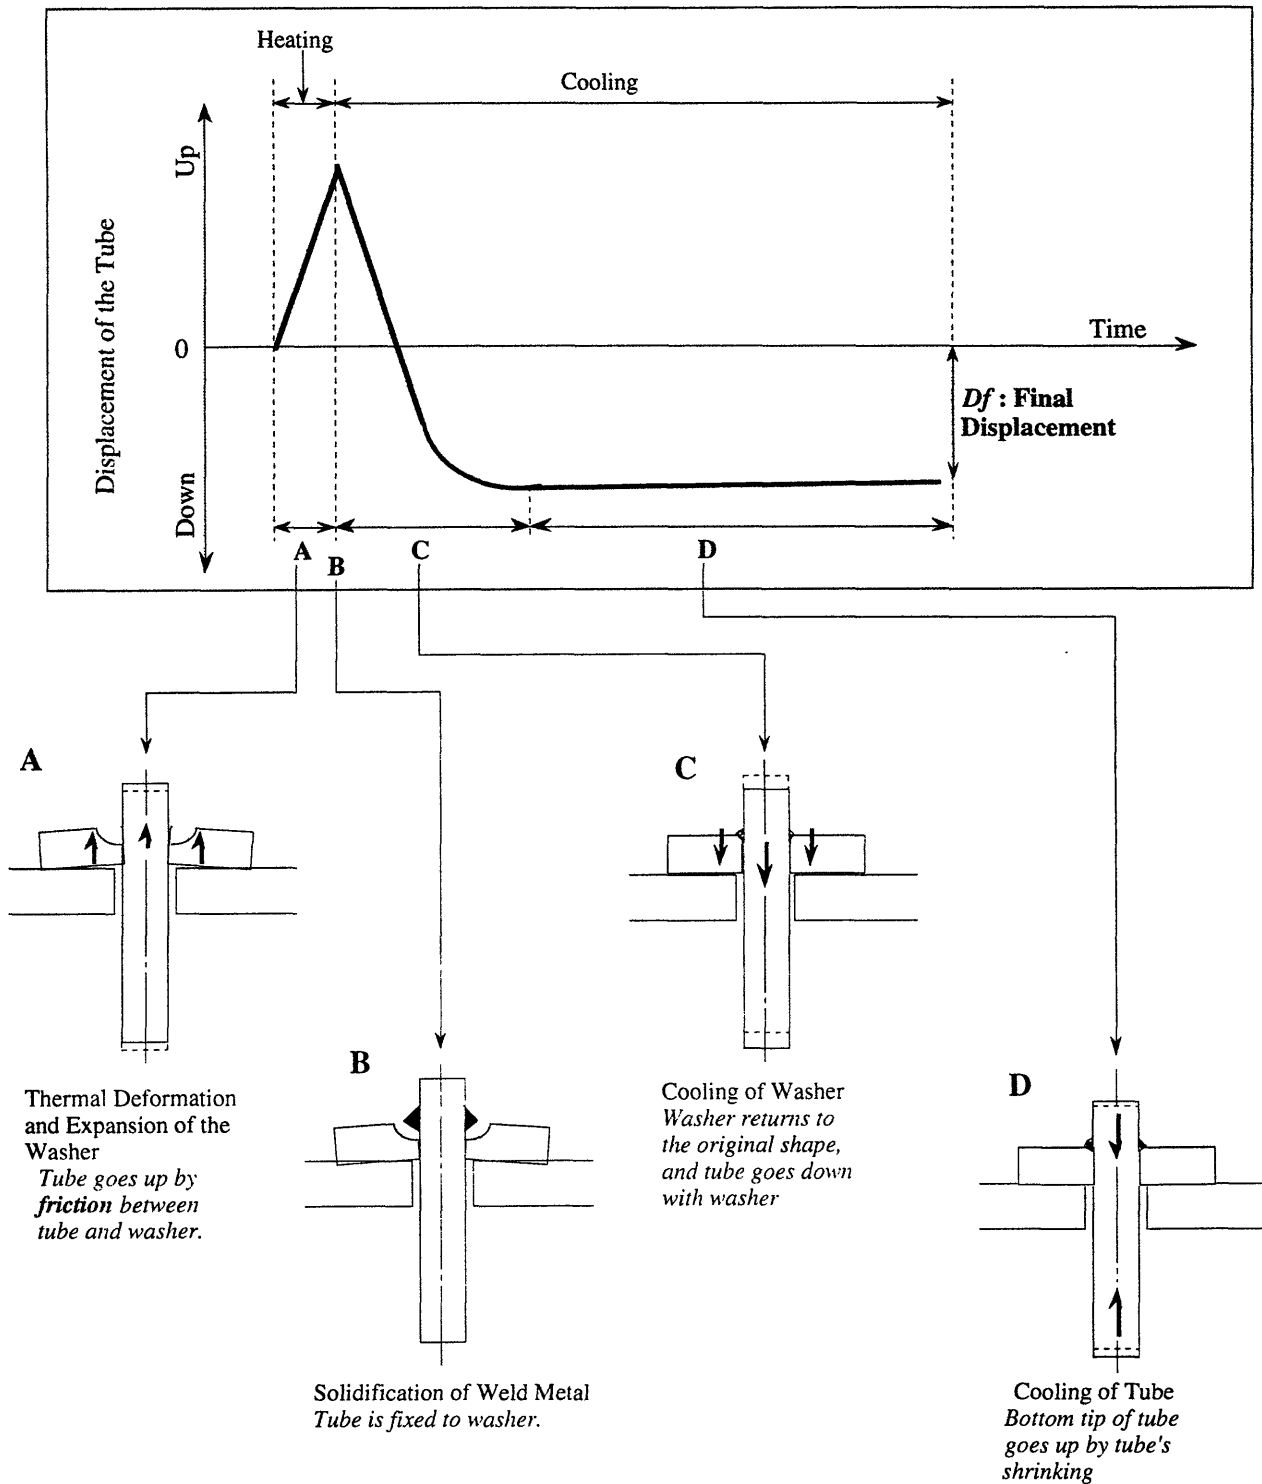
The formation of deformation due to welding for cylindrical geometry
